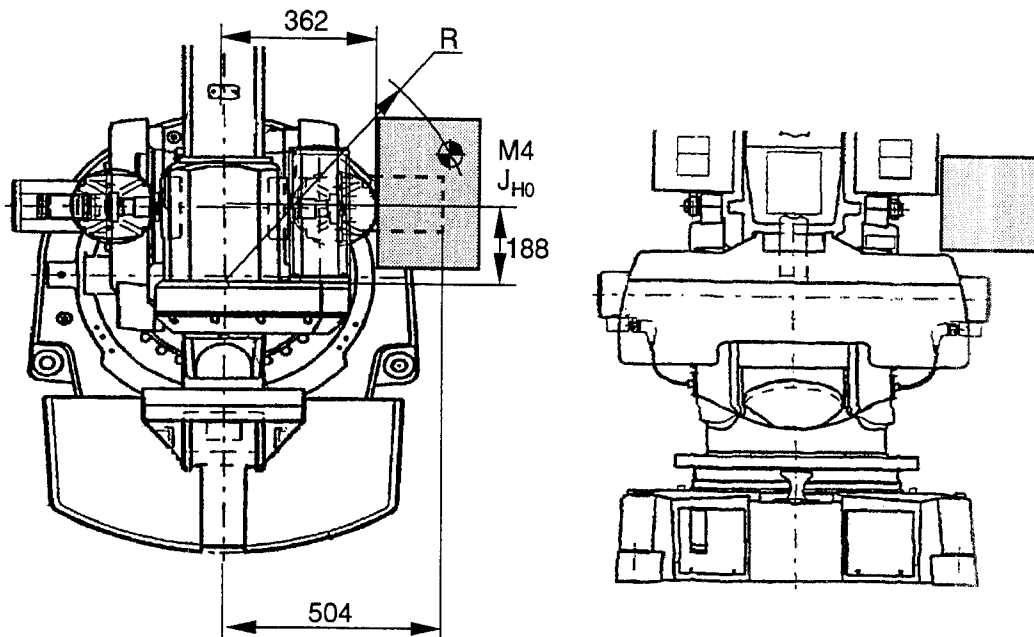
Extra load on frame of IRB 6400 /2.4-120, /2.4-150, /2.8-120, /3.0-75 and IRB 6400PE /2.25-75. (dimensions in mm).
